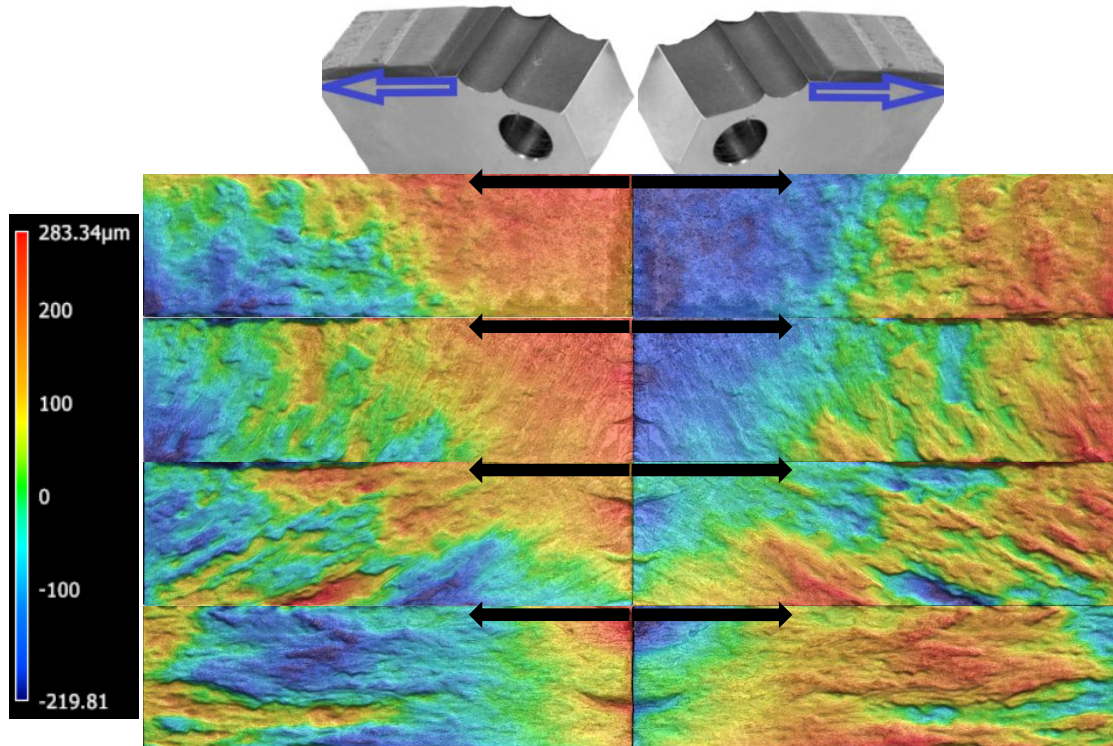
6 mm specimen fracture surfaces (complementary halves side by side) with build orientations (top to bottom) 0, 30, 60, and 90 degrees from FCGR testing
